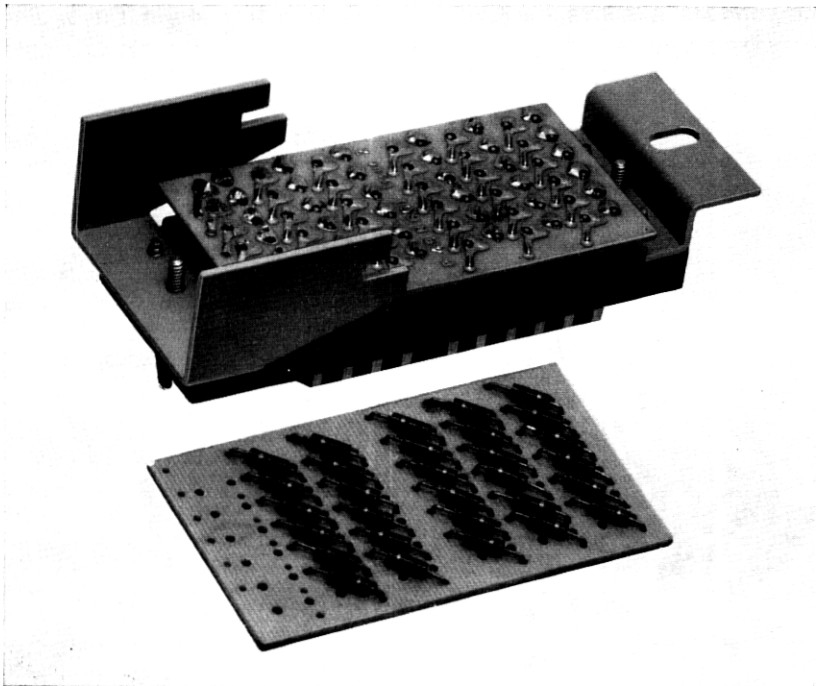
Bus Terminating Resistors mounted on printed wiring board, and connector.
